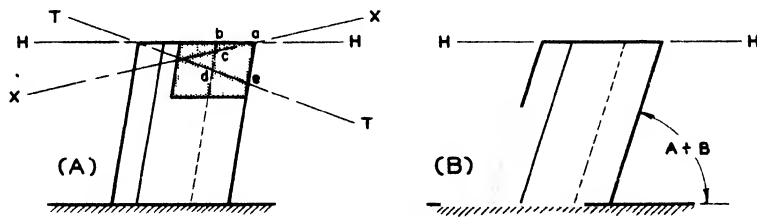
Setting Straight Tools without Back Rake for Regrinding (Left) and Tool Which Has Back Rake (Right)
